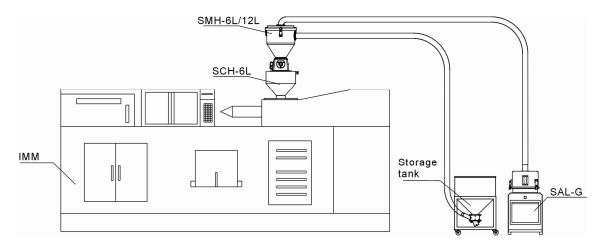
Installation layout 3 (SAL-900G/900G2)
